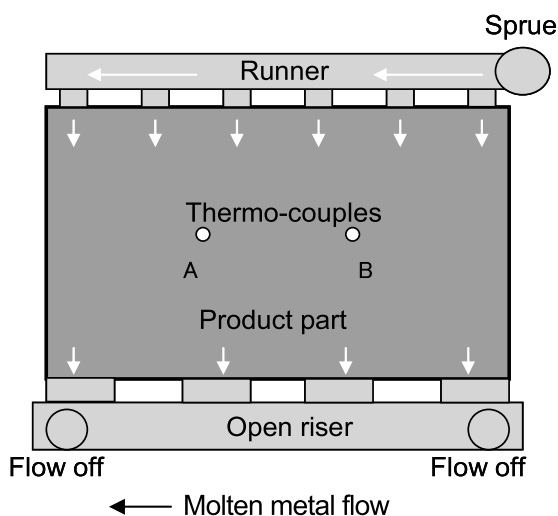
Schematic illustration showing molten metal flow and mold design for casting
